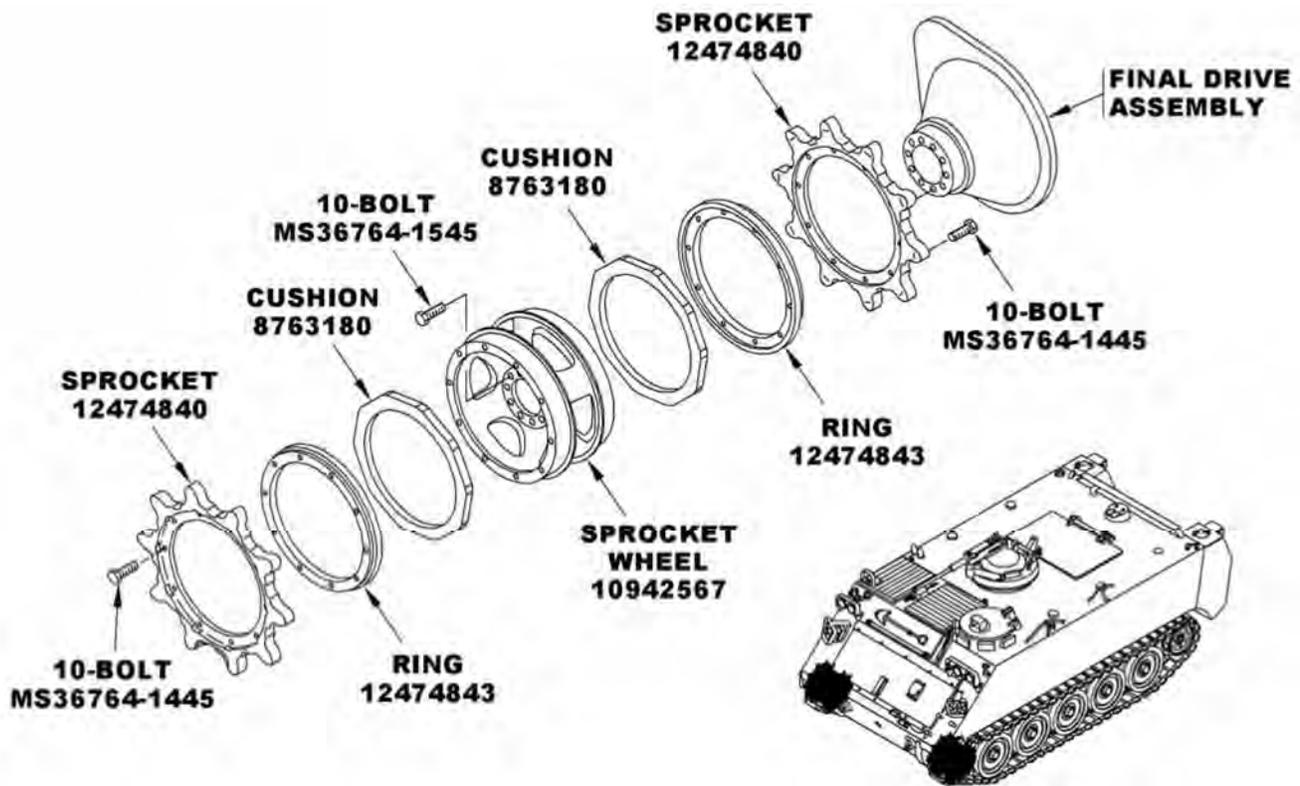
Install T150F Track Sprocket Wheel Assembly on Vehicle
